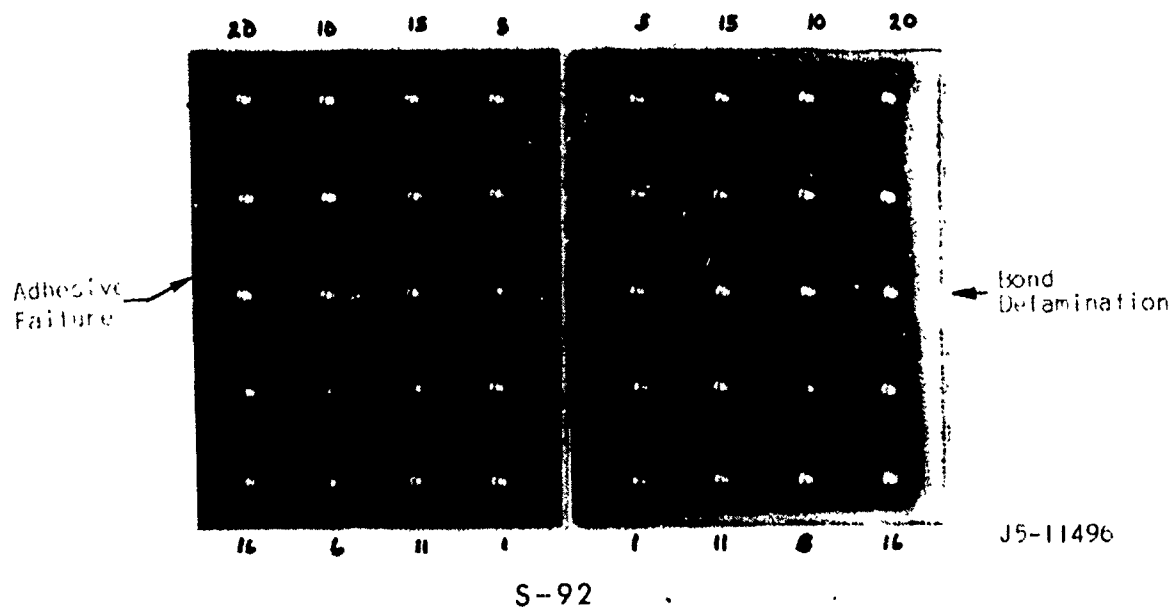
ADHESIVE AND DELAMINATION FAILURES
